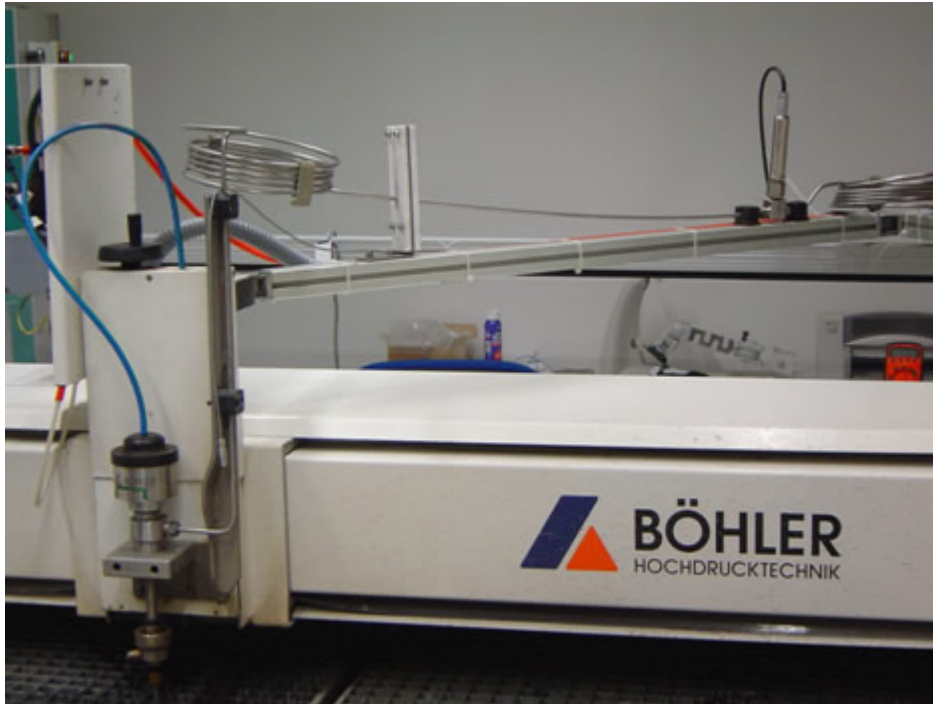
P3MBP Blue Line 1-P3MBP/5000bar on a Böhler waterjet cutting machine
